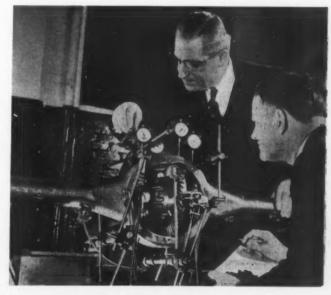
Laboratory test by means of indicators shows actual deflections in rear axle assembly under load
